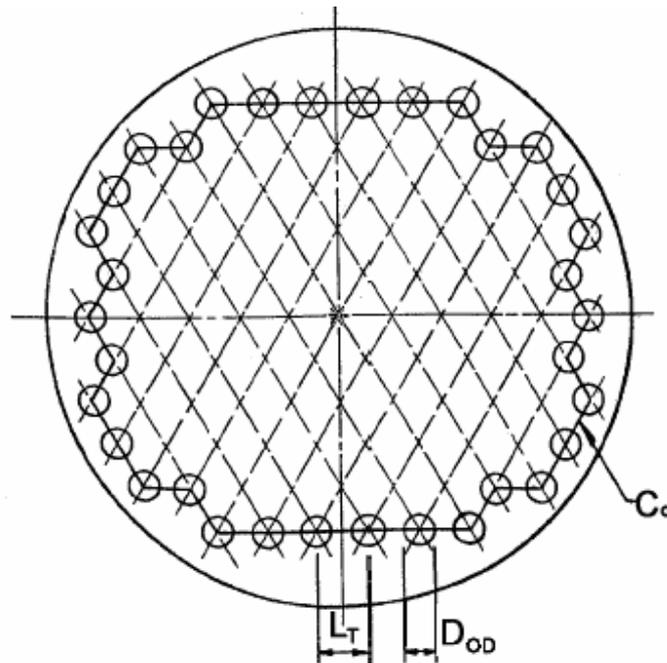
Sample tubesheet pattern in a cylindrical shell [3]
